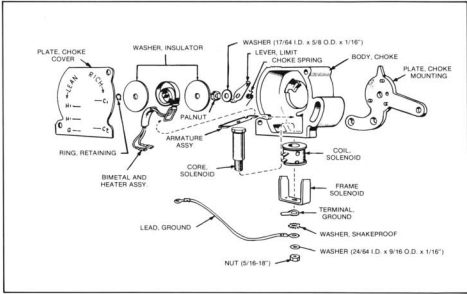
EXPLODED VIEW OF THERMO-MAGNETIC CHOKE
